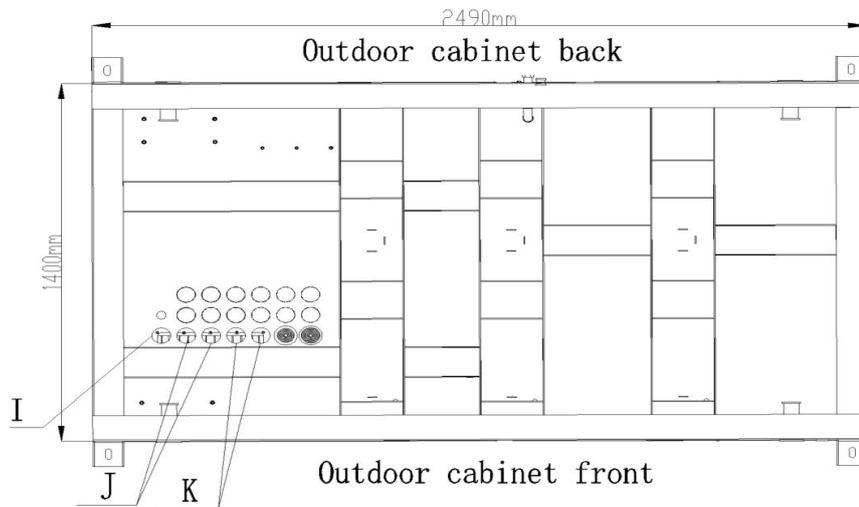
\_ Outdoor Cabinet Bottom Cable Entry Hole Layout
